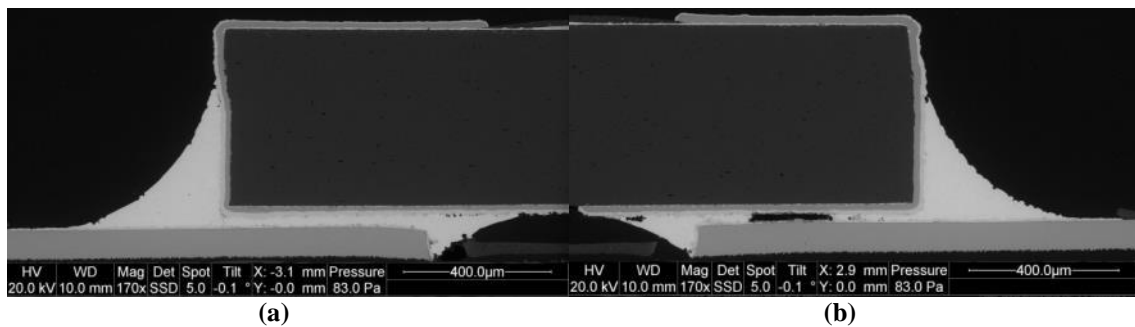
R2512 – SAC305+0.17%Mn (a) Left Solder Joint (b) Right Solder Joint after 1000 hours/200°C Aging
